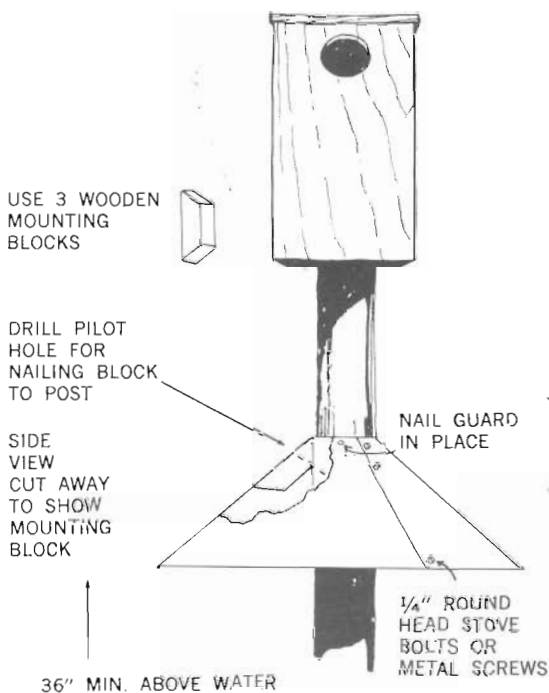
Assembly and mounting details for conical predator guard. See Figure 5 for cutting pattern.
